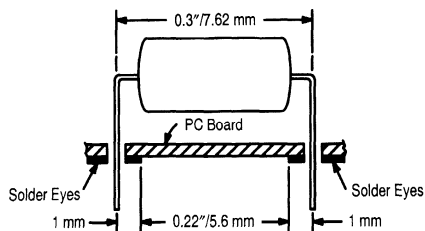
Optocoupler Mounting on PC Boards for Safety Class II with Clearance
